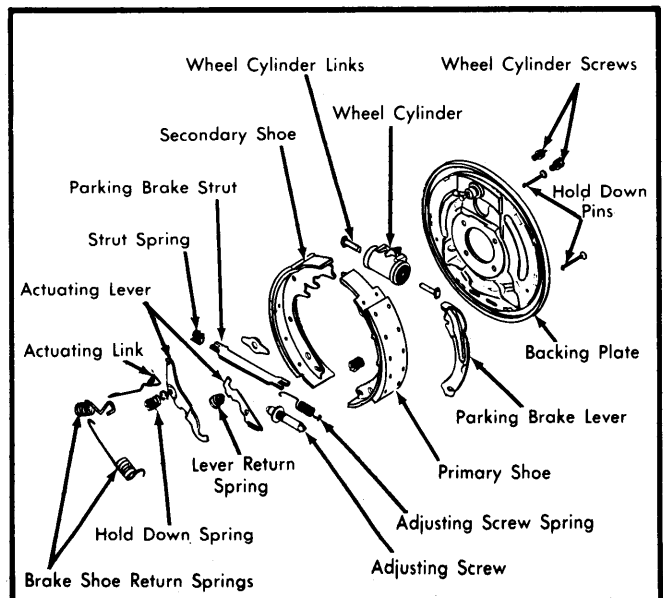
Exploded View of Rear Drum Brake Assembly (All Other Models)
